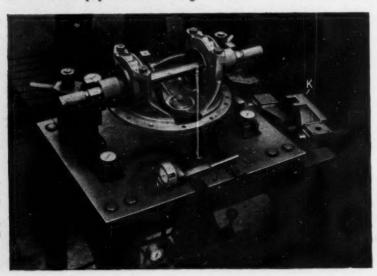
Inspection of the relative positions of the differential bearing and driving pinion bores is carried out with this receiver gauge which incorporate dial gauges
